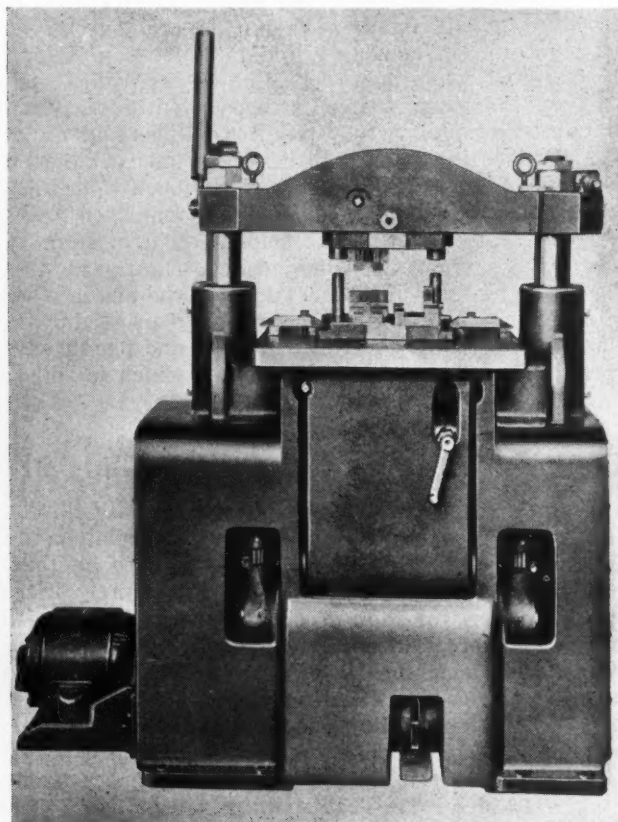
Forty-ton "Try-out" Press Built by the Alpha Tool Works
